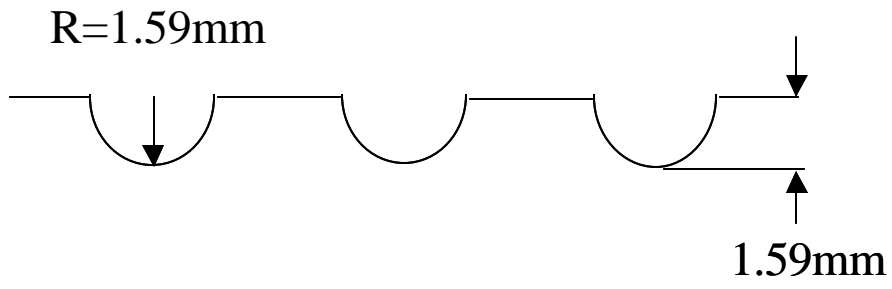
2:1 Aspect Ratio Bumpy Plate Test Section Additional Groove Geometry (Edge View)
